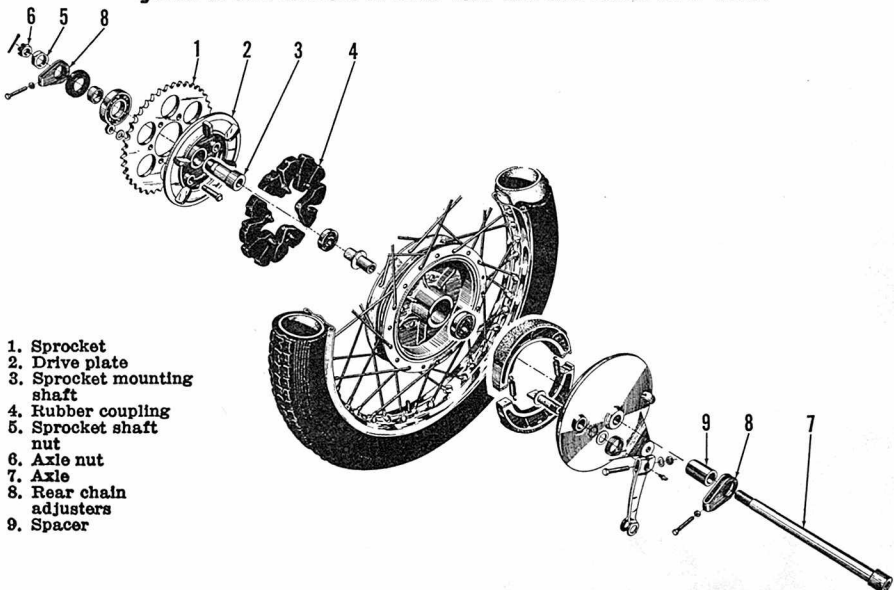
On some models, the rear wheel can be removed without disturbing rear sprocket (1). Lugs on drive plate (2) fit into coupling (4) in wheel.
